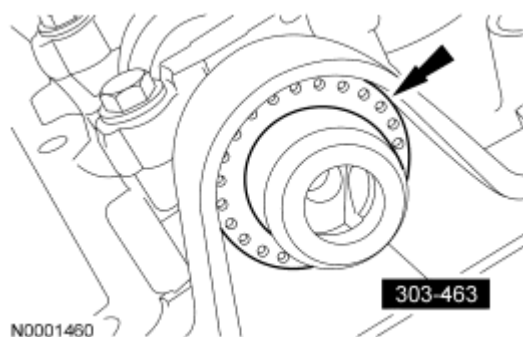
Positioning Special Tool & Camshaft Oil Seal On Camshaft
